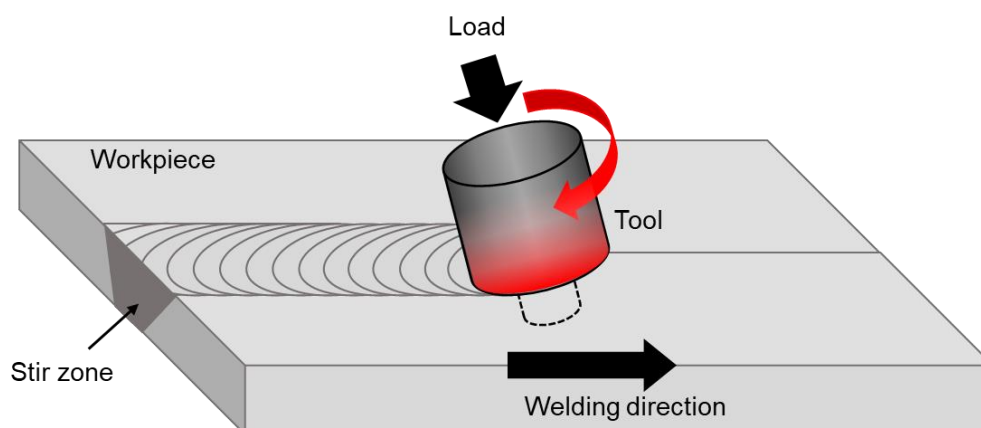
Schematic illustration of friction stir welding.
